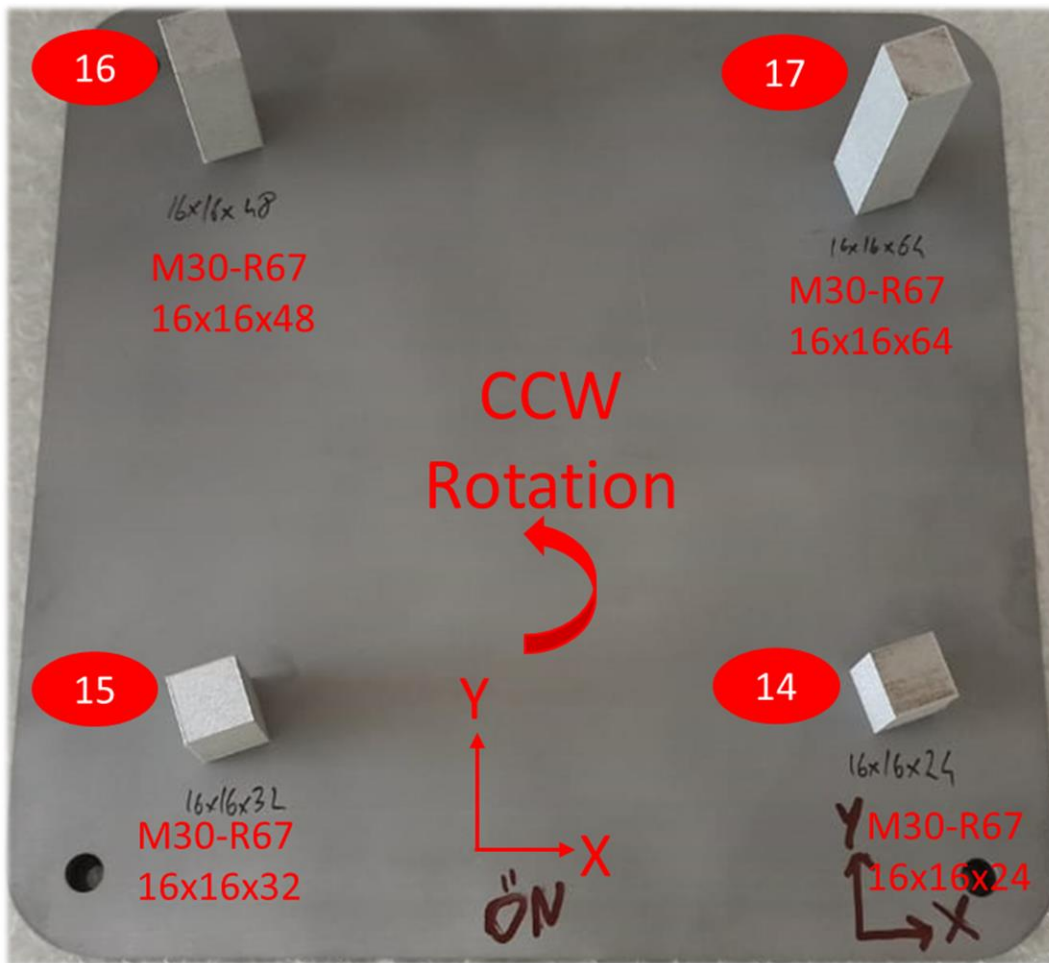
30-M 16mmx16mmx24mm Rotation 67° (specimen#14), 30-M 16mmx16mmx32mm Rotation 67° (specimen#15), 30-M 16mmx16mmx48mm Rotation 67° (specimen#16), 30-M 16mmx16mmx64mm Rotation 67° (specimen#17)
